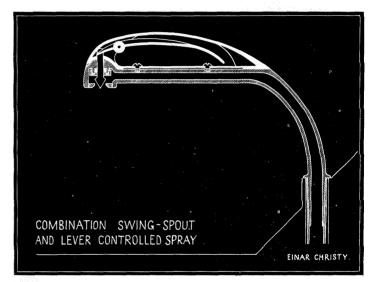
Cross-sectional drawing of swing spout for a sink, designed for collective project of kitchen equipment. (Second year work) Photograph by O. K. Harter
